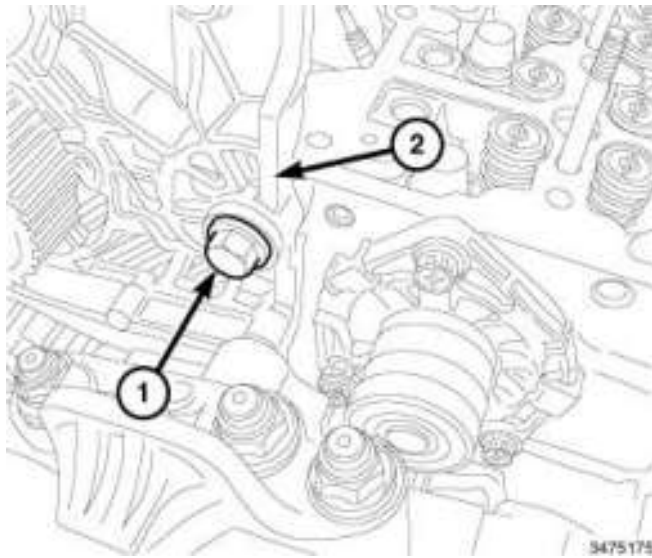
Fuel Injection Pump Mounting Bracket & Bolt
